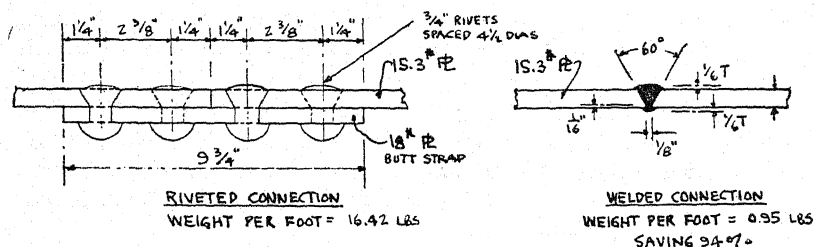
Comparative weight—riveted and welded deck butts.
